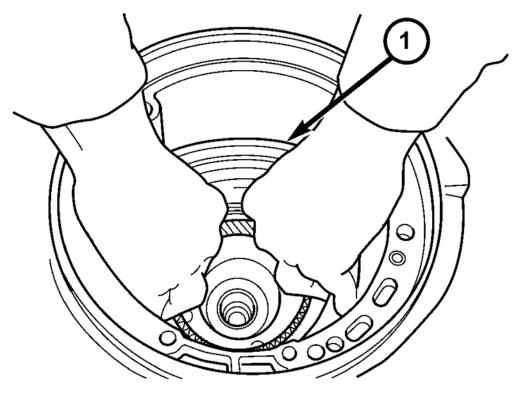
Verifying Proper Orientation Of Return Spring To 2/4 Retainer Courtesy of CHRYSLER LLC
